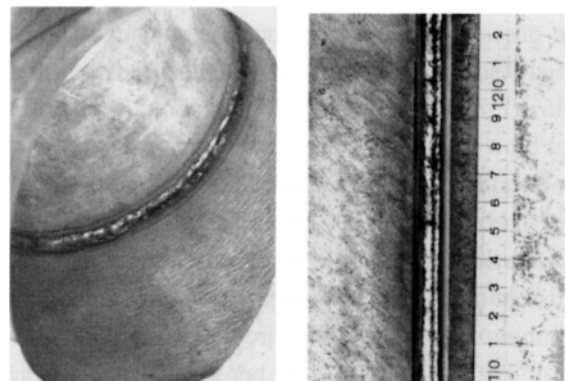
Glossy, regular bead appearance of the root pass weld of a 304-type stainless steel pipe welded with TGX-308L without back shielding
